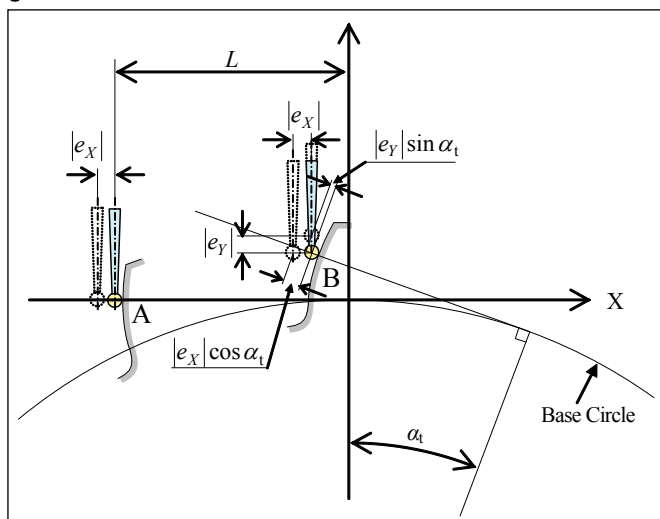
Measurement error by TDG Method (A) and NDG Method (B).
